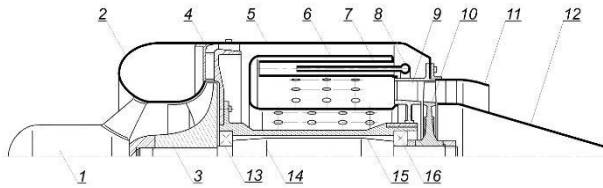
Cross section of the GTM 120 engine and its basic elements: 1 – electric starter, 2 – inlet, 3 – compressor rotor, 4 – diffuser, 5 – combustion chamber case, 6 – combustion liner, 7 – evaporators, 8 – fuel manifold, 9 – turbine nozzle ring, 10 – turbine rotor, 11 – outlet nozzle, 12 – central cone of the exhaust system, 13, 16 – bearings, 14 – shaft, 15 – shaft sleeve (own elaboration)
